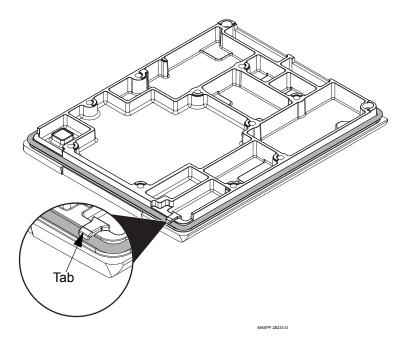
Inspecting the Thermal Pad and Installing the Cover Main Seal
